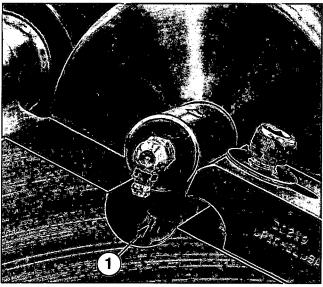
Installation of 7, 8, 10, 12, 14 and 16 knife spindles. (1) Side Frame Pin.
